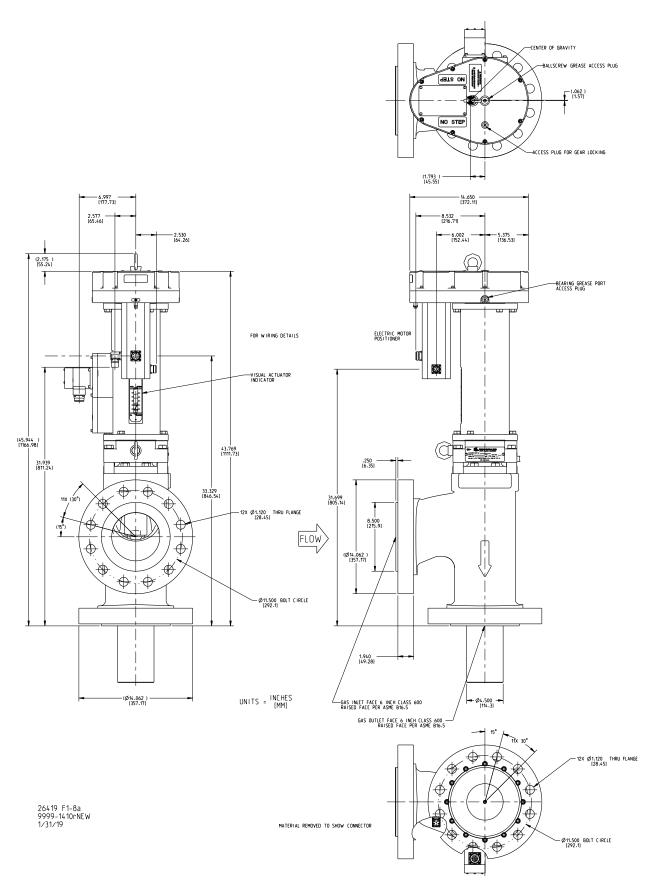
Outline Drawing (6-Inch LESV Class 600)
